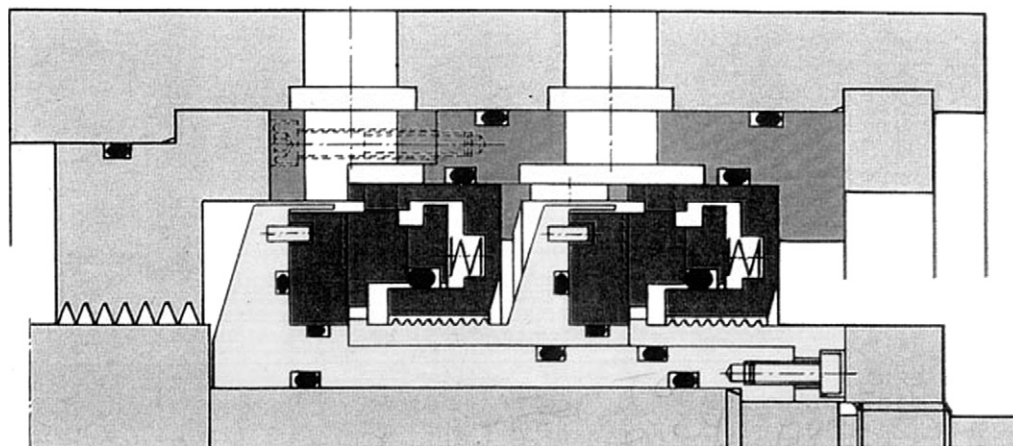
• Tandem seal (Courtesy of Flowsolve Corp.)
